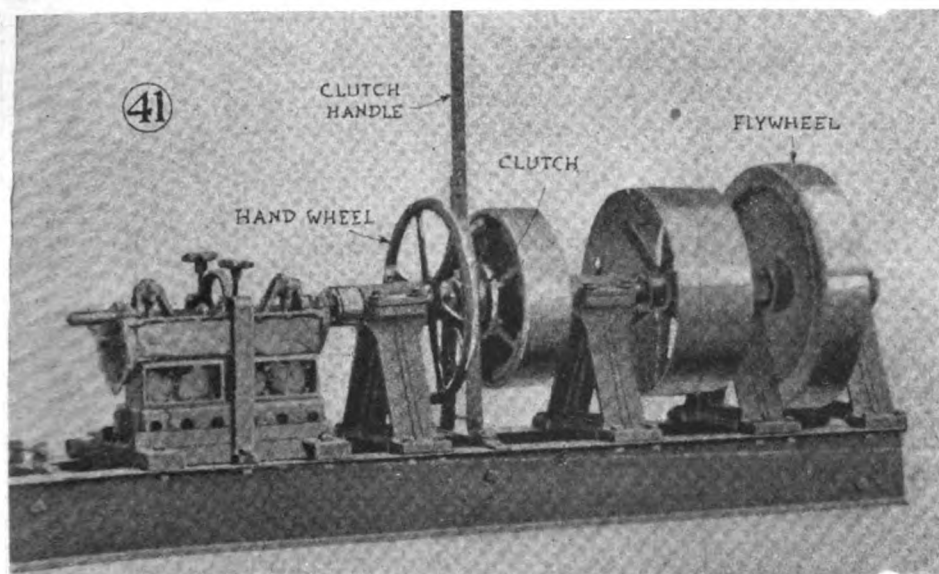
This is another type burning-in machine. A flywheel is added to the shaft and it differs in some other respects from the one shown in Fig. 40, but the principle remains the same
